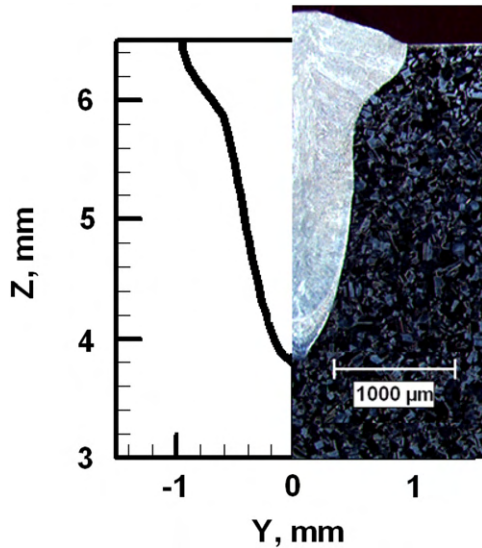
Experimental and calculated fusion zone cross-section for 21Cr-6Ni-9Mn stainless steel laser weld made at 16.9 mm s^{-1} welding speed, 1500 W input power and -1.27 mm beam defocus. The computed weld pool geometry is shown by the solid line.
